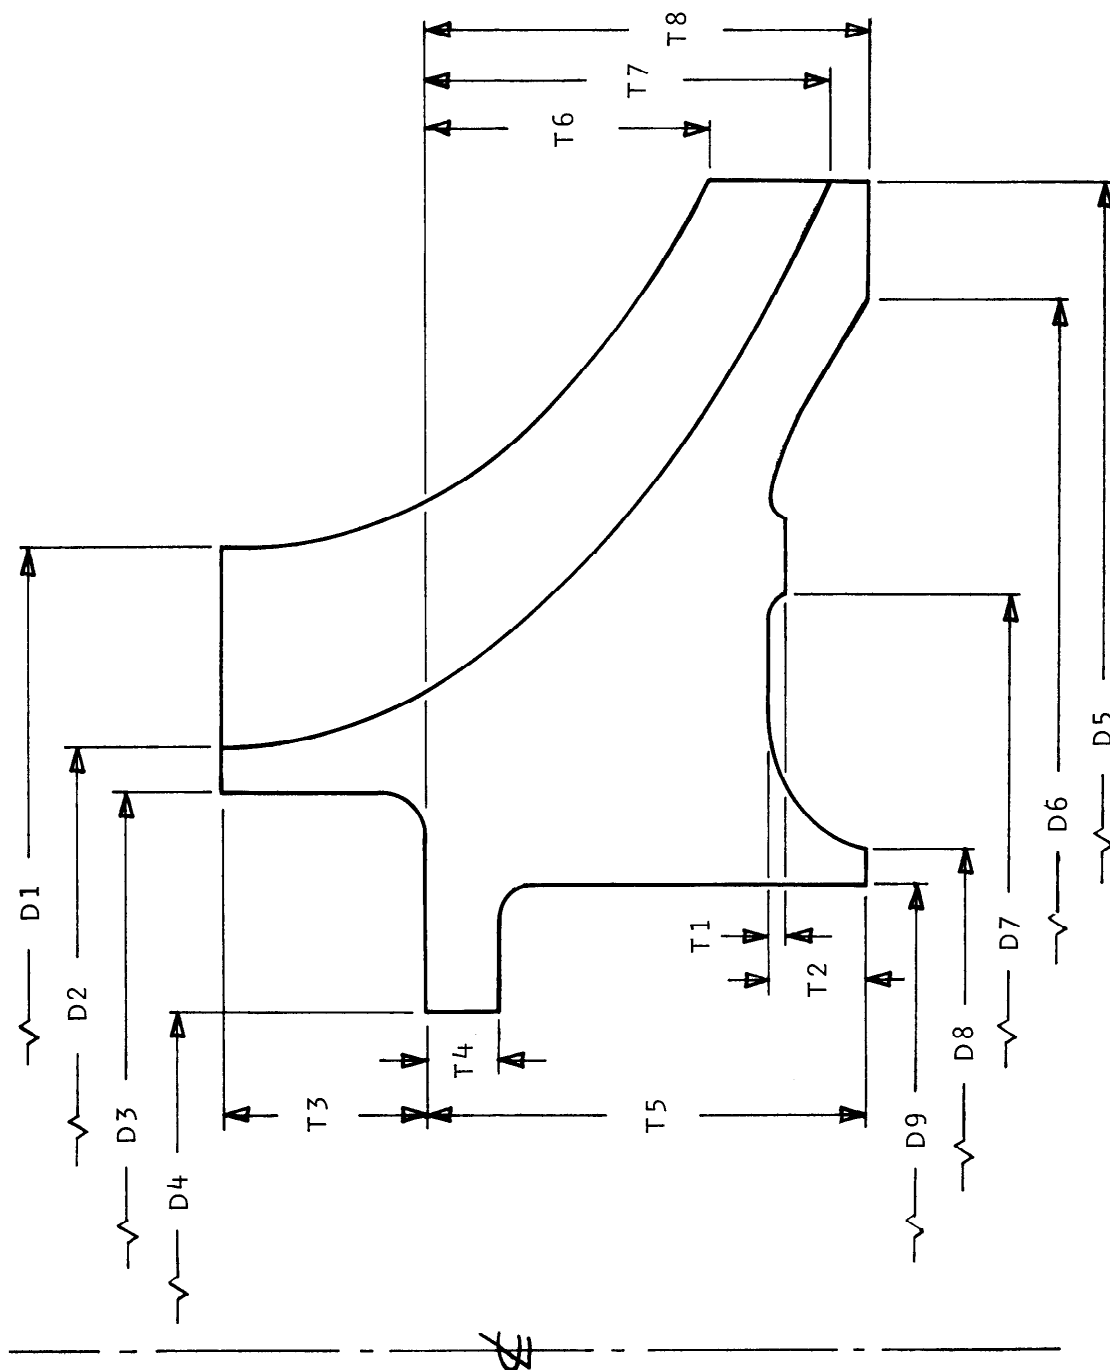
Dimensional Checks Performed on Forging S/N 5
